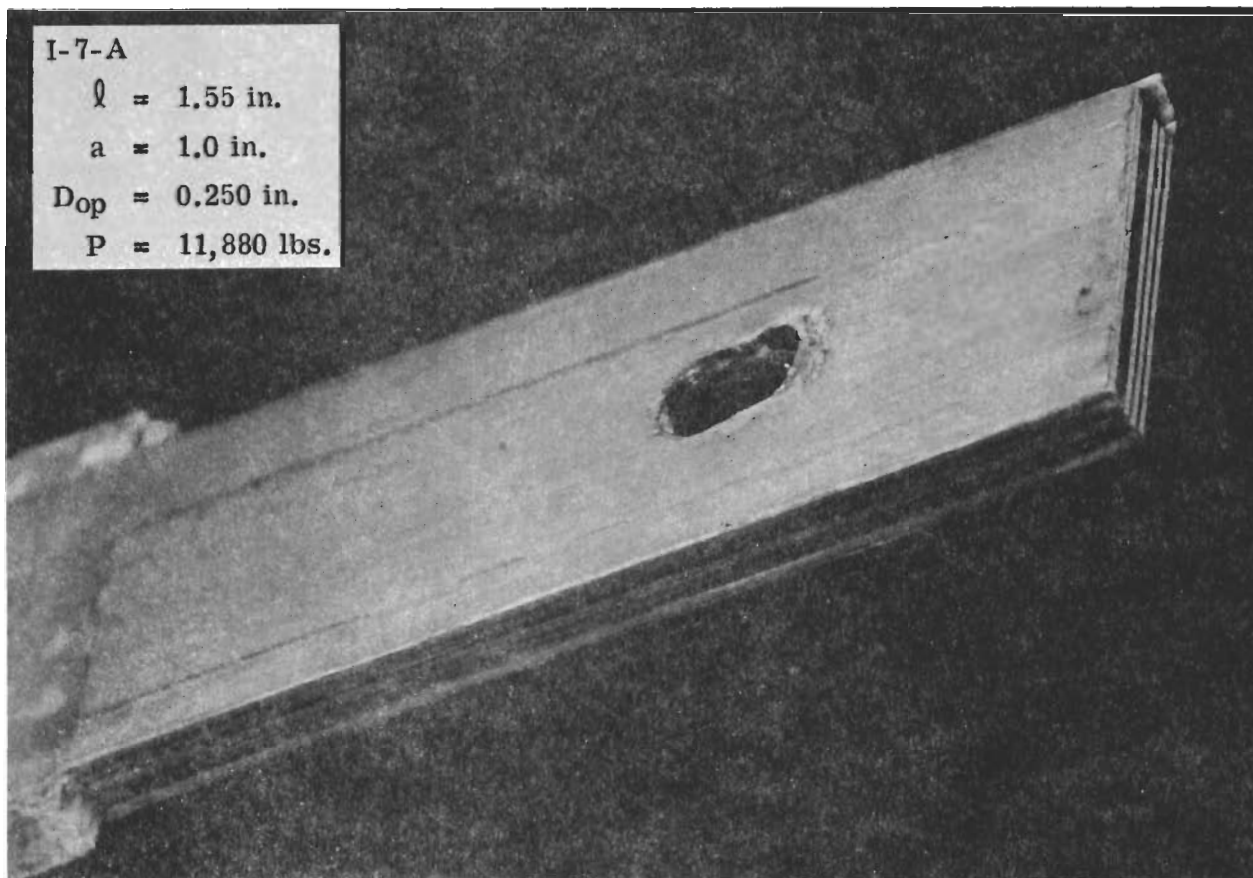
Flat Plate Specimens-Pin Bearing Failure
